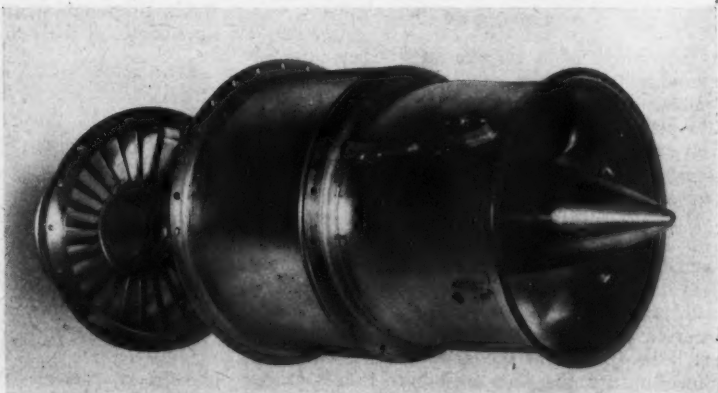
Castings and other stainless steel components are joined by a combination of welding and nickel-alloy brazing to produce this gas-turbine assembly after they have been tack-welded in position
